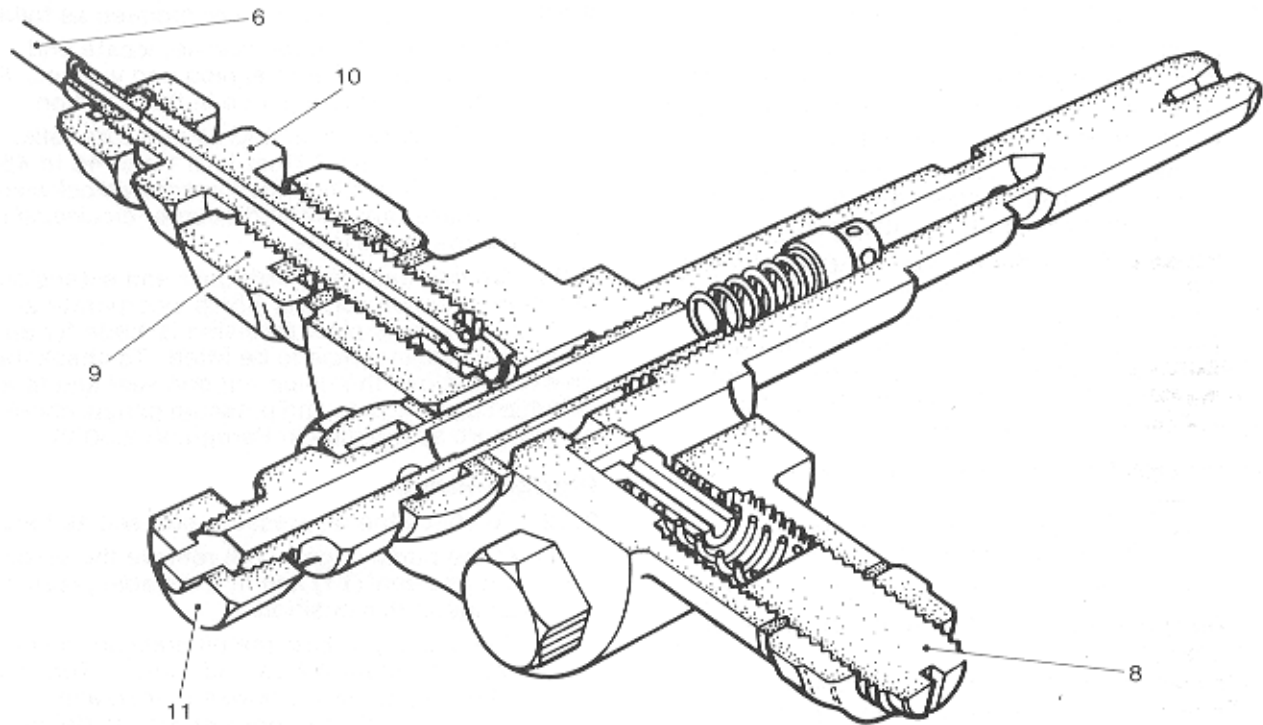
Plunger Oil Pump: Reducing and Pressure Relief Valves
